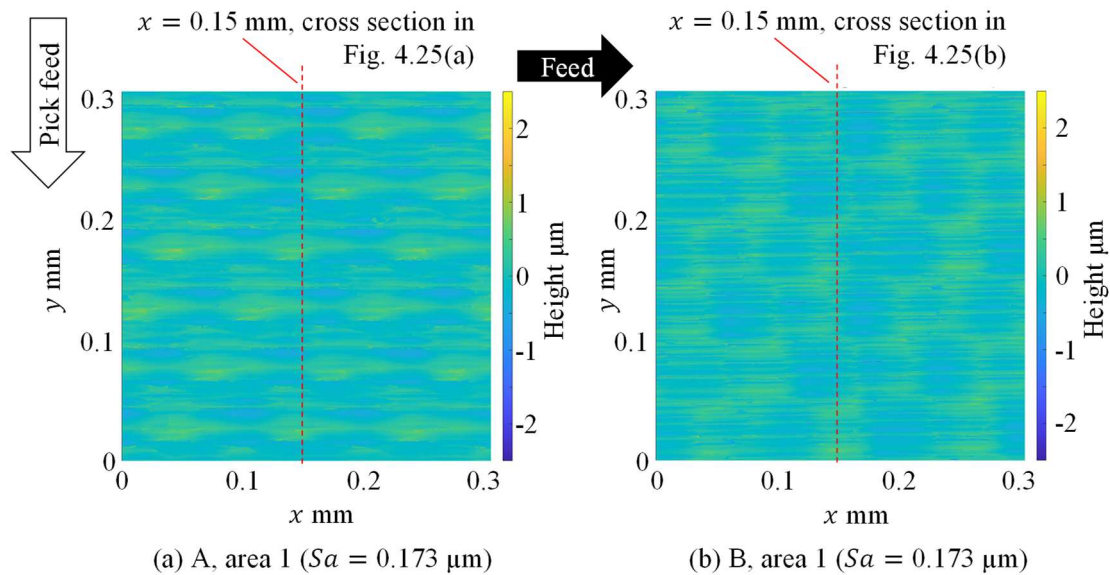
Surface shape of workpieces A and B measured by white-light interferometer
